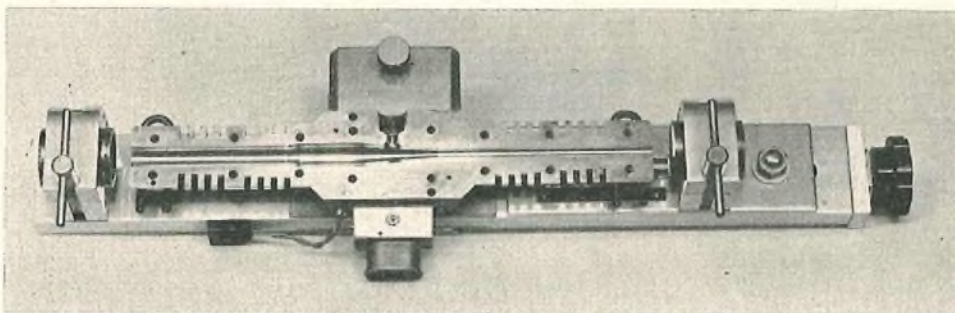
MOULD FOR 0.620 IN. TO 0.310 IN. DIAMETER JOINTS
